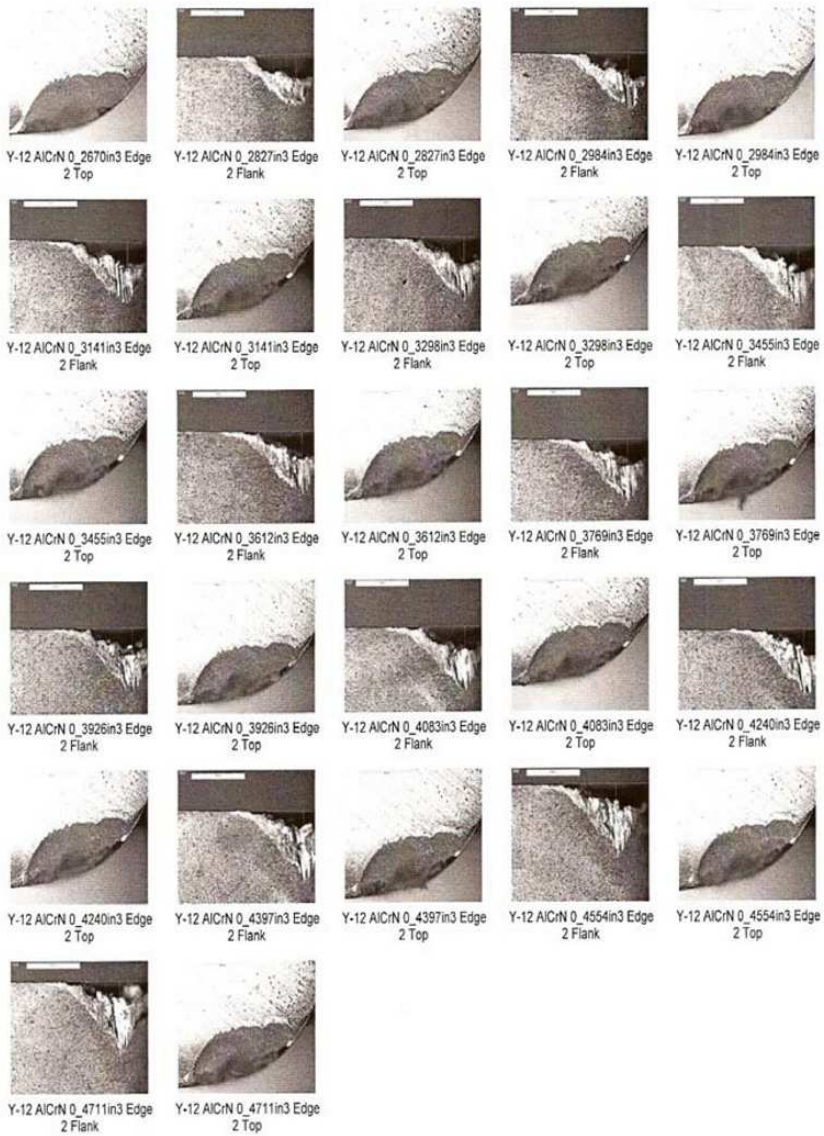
AlCrN Tool Cutting Edge 2 machined at 158 RPM. 0.2670 - 0.4711 in³ workpiece removed
